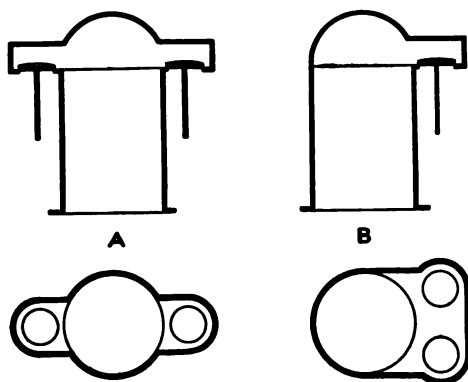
A*, T-head valve arrangement; *B*, L-head valve arrangement
